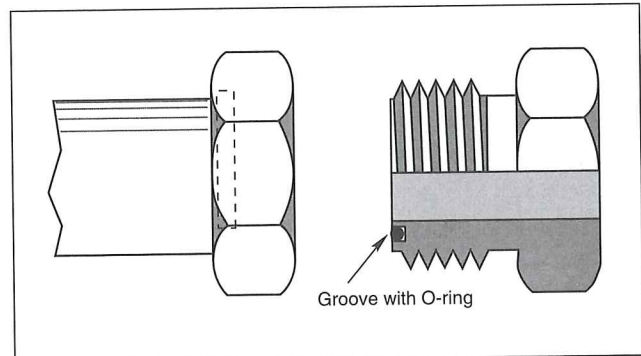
Flat-face O-ring fittings seal by pressing the O-ring against a finished metal surface.
